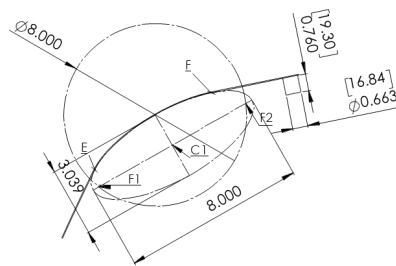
2D Drawing of ellipse detail and dimensions in inches and [millimeters].
